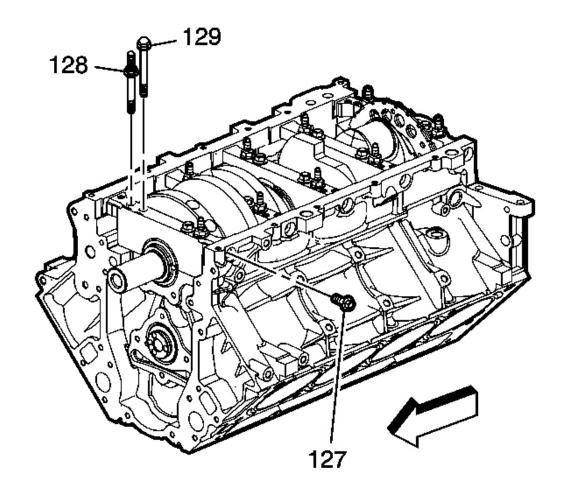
Crankshaft Bearing Caps & Studs Courtesy of GENERAL MOTORS CORP.
